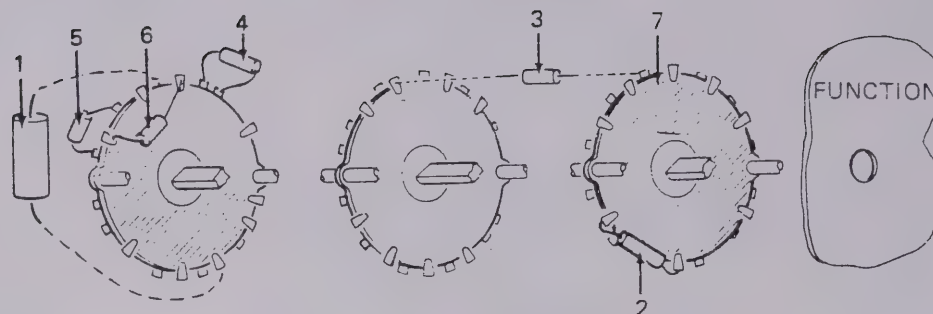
FUNCTION Switch Assembly, Part No. 19915-777
